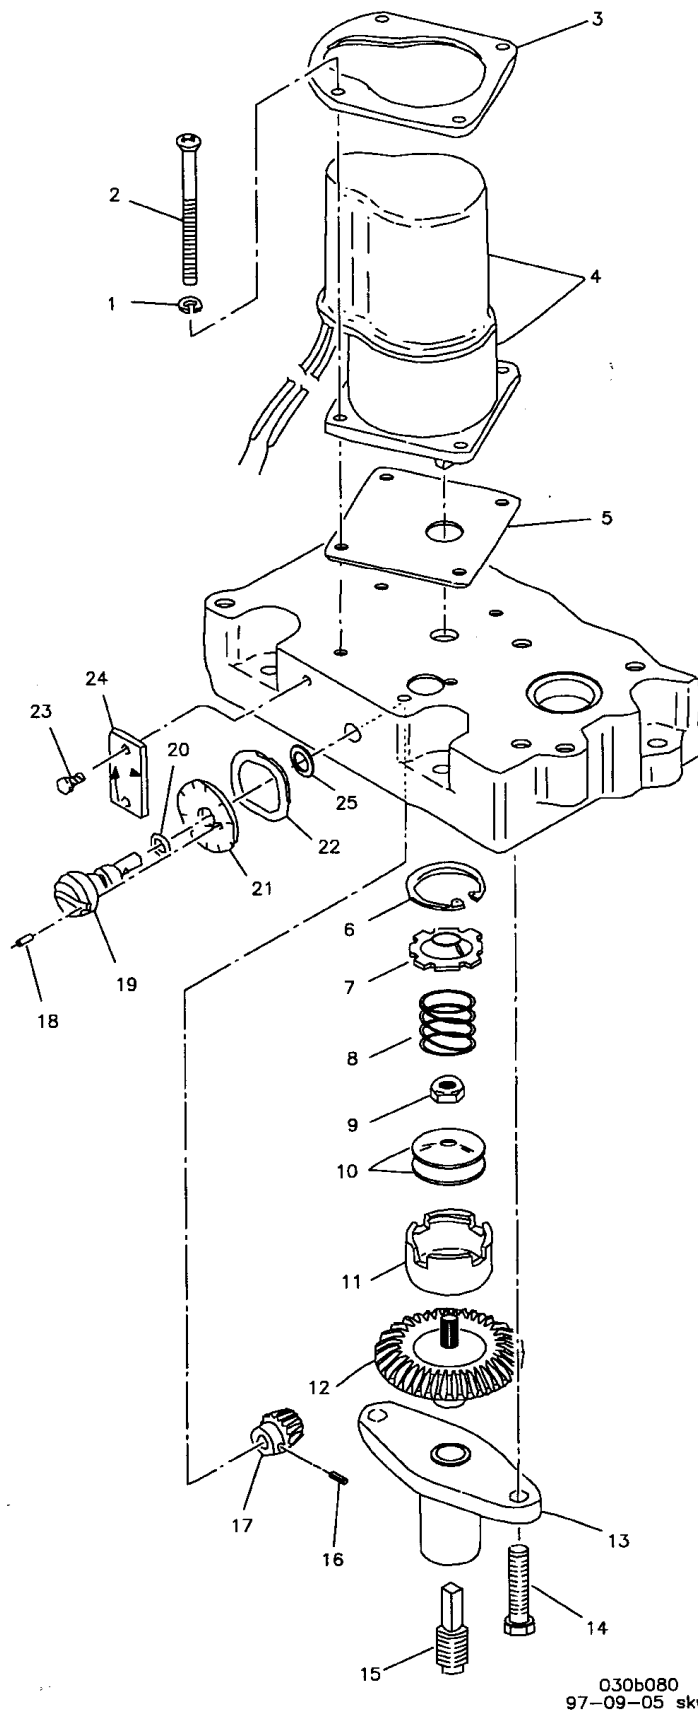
Parts for Speed Adjusting Motor with Manual Speed Adjustment
